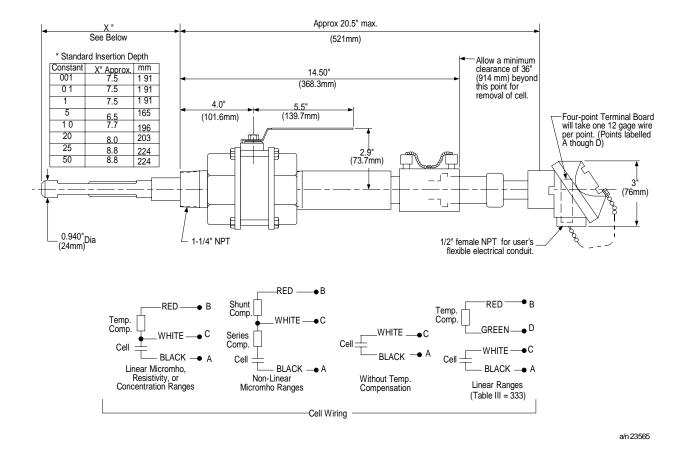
Outline and Dimension Drawing for Insertion/Removal Mounting and Cell with Universal Head
